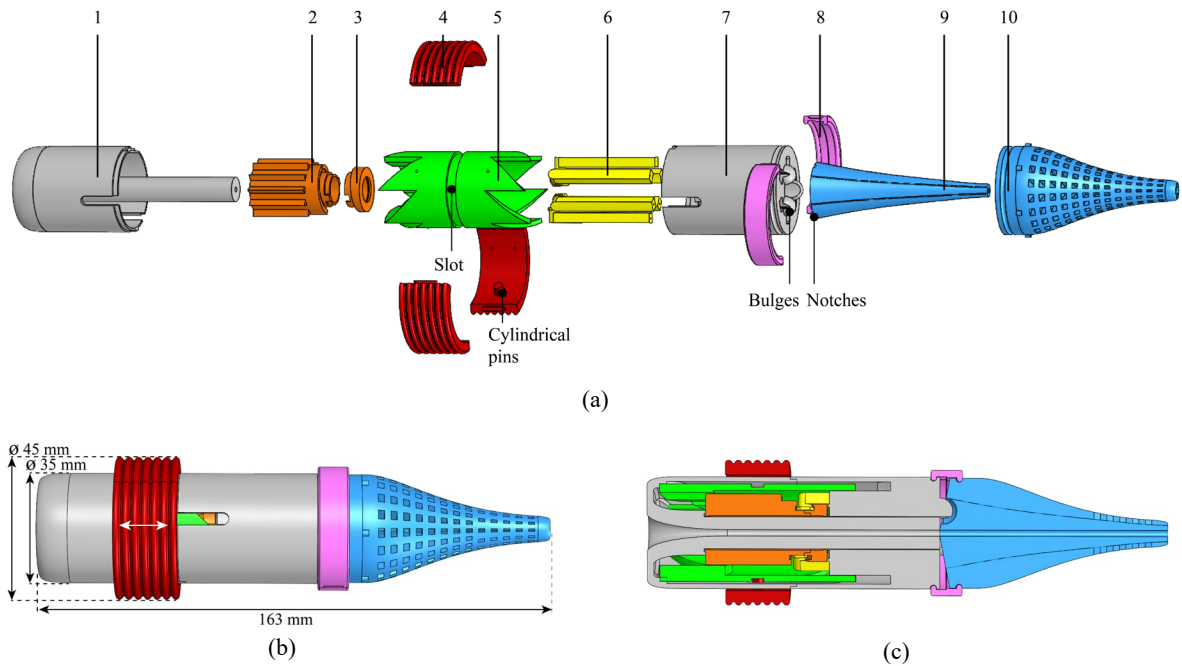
(a) Exploded view of the actuation and steering unit, consisting of a housing bottom (1), cam bottom (2), cam top (3), manual translation ring (4), selector (5), needle segment holder (6), housing top (7), lock ring (8), double cone inside (9), and double cone outside (10). (b) Sketch of the assembly of the actuation and steering unit, indicating its outer dimensions. The manual actuation of the manual translation ring is indicated with a white arrow. (c) Sketch of the cross-section of the assembly of the actuation and steering unit.
